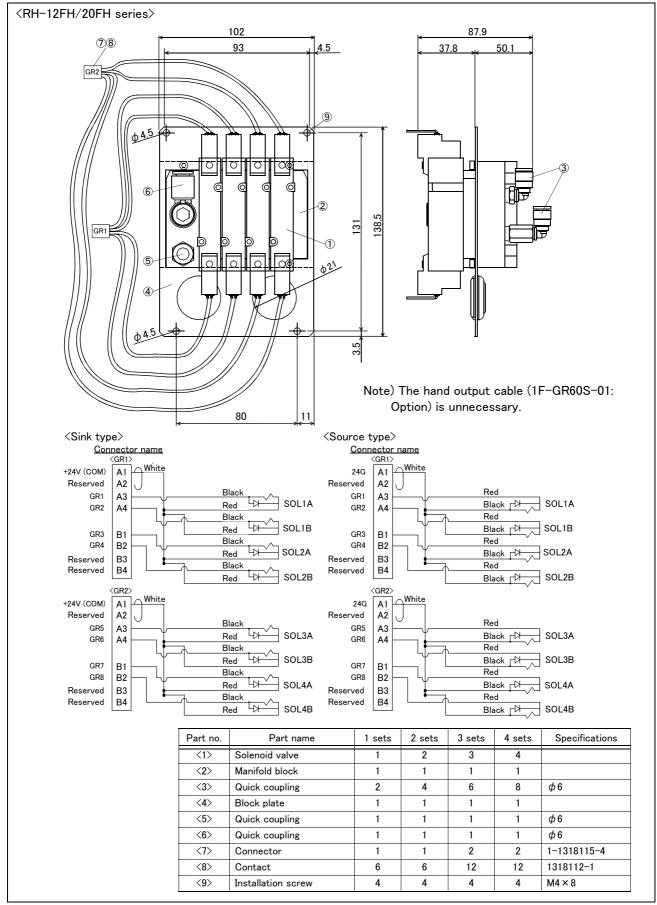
Outline dimensional drawing (RH-12FH/20FH series)
